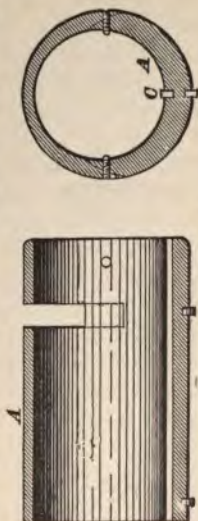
SLEEVE, "STRAIGHT-LINE" JOURNAL BOXES.
